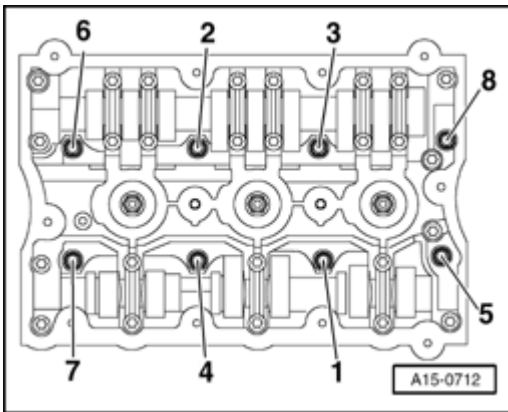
Tightening Cylinder Head Bolts In Sequence
